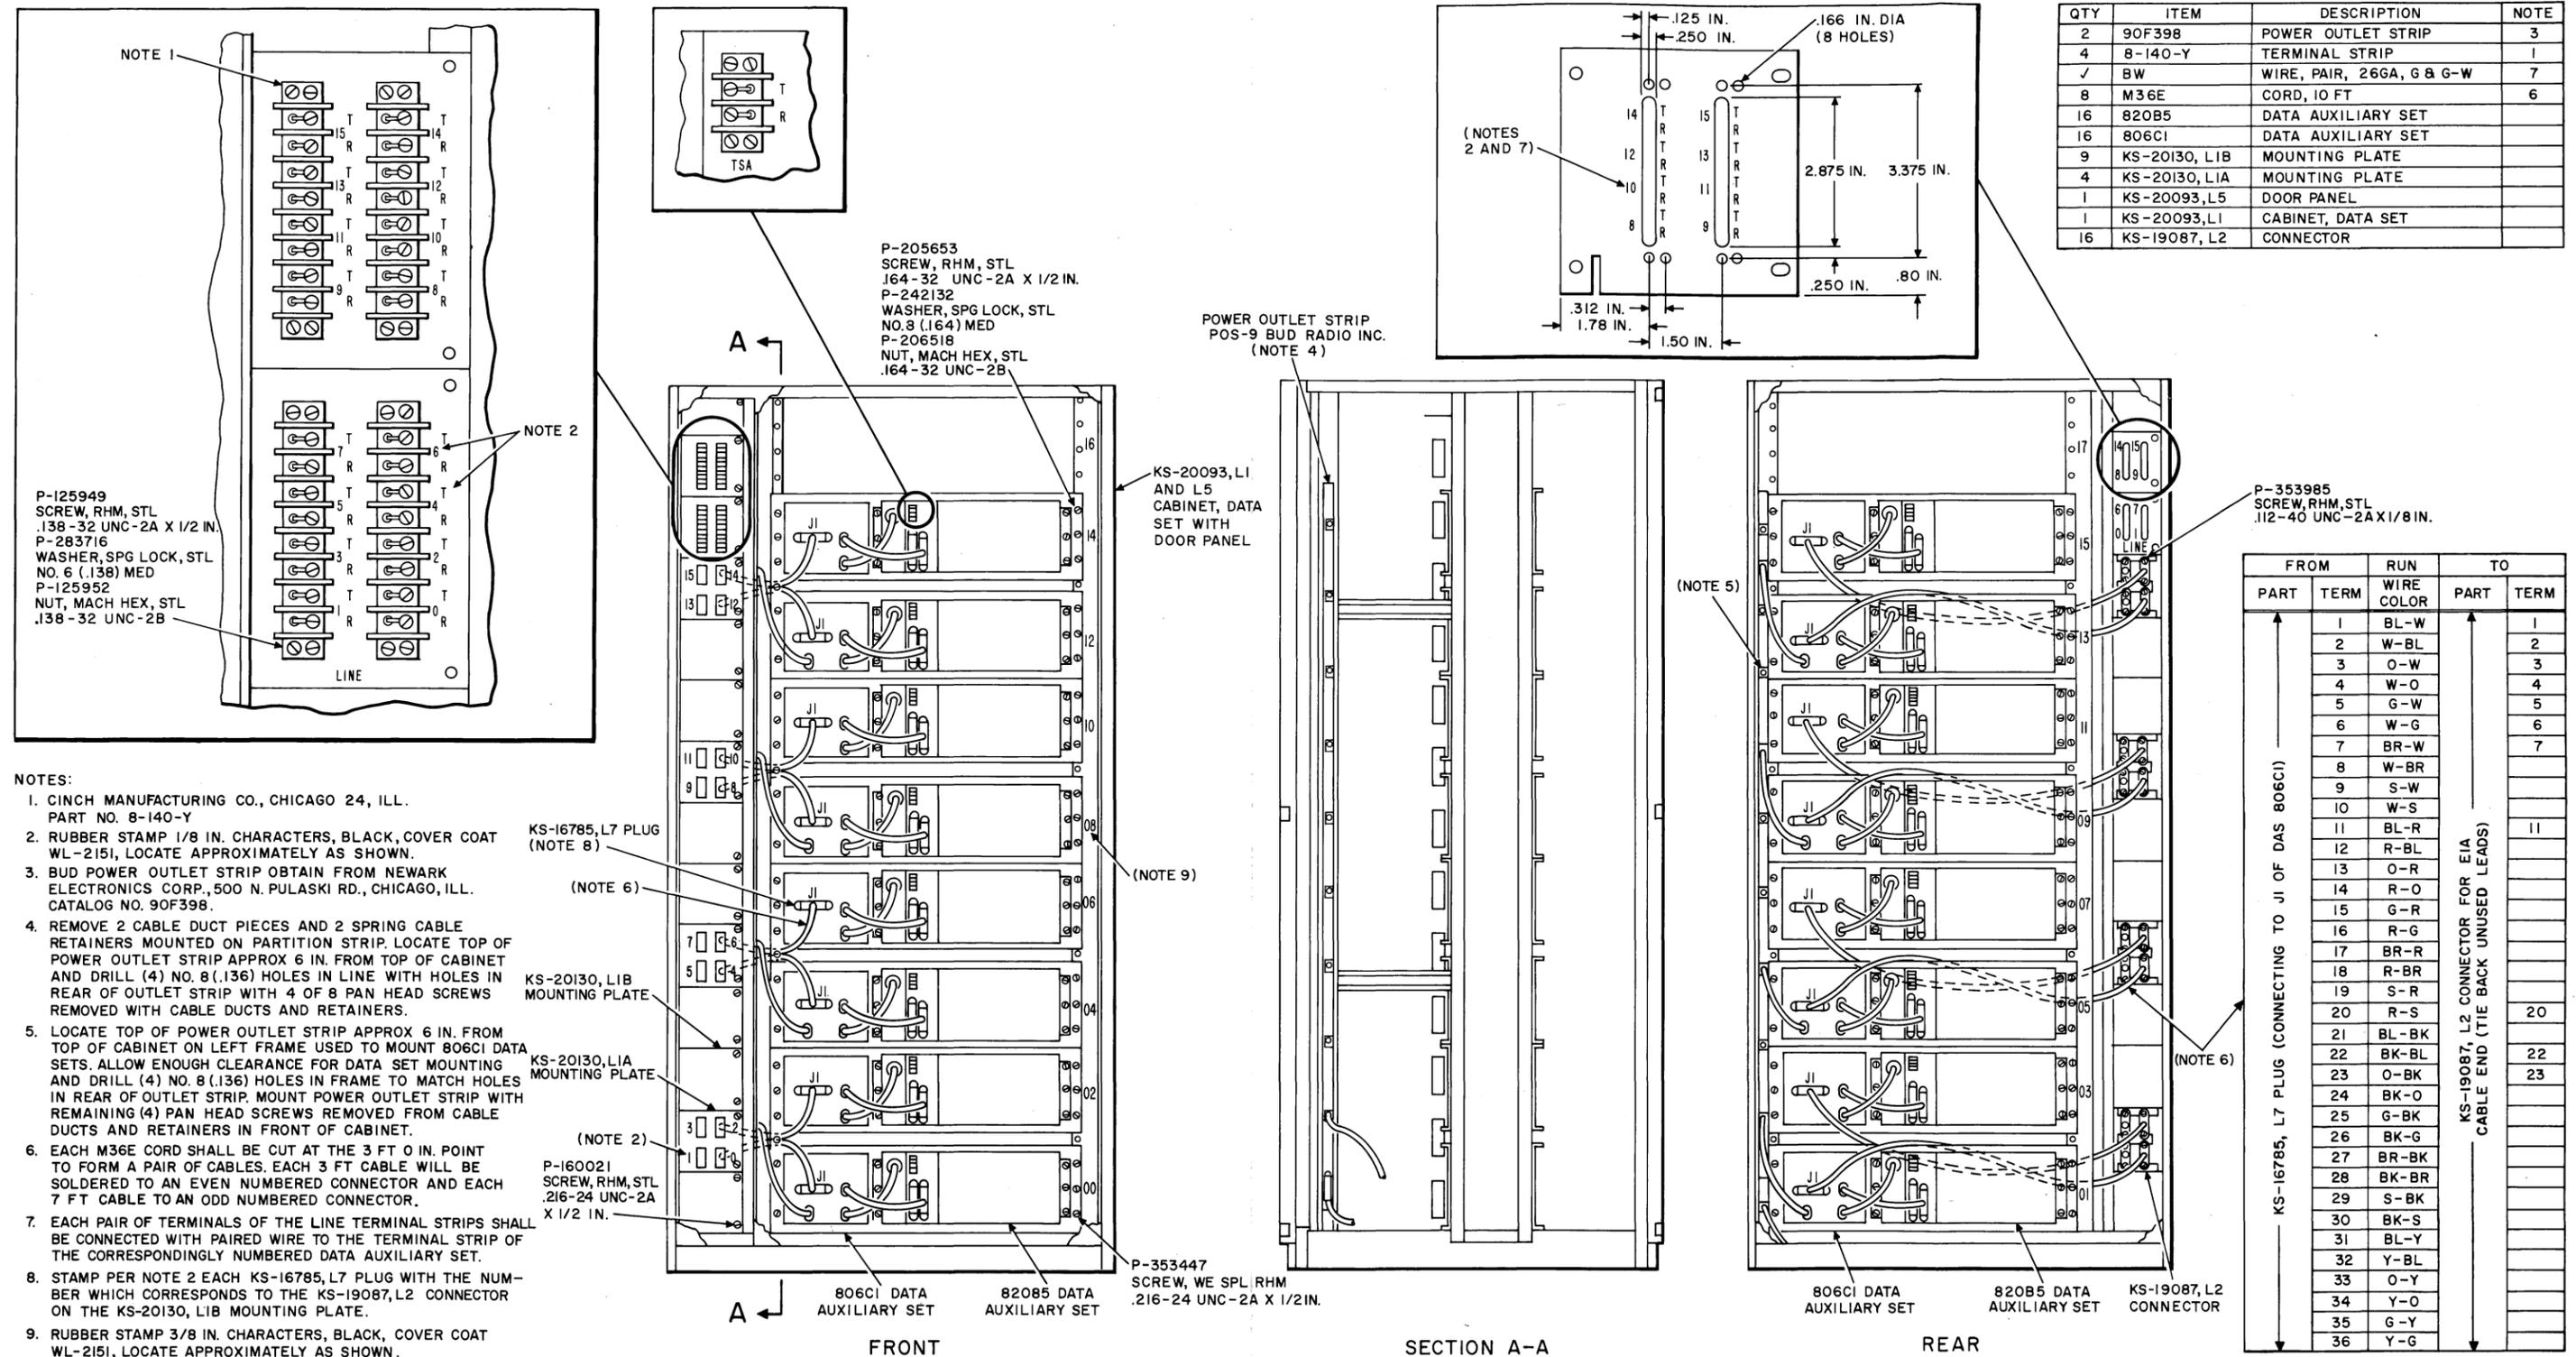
Typical Installation Using the KS-20093 Cabinet
